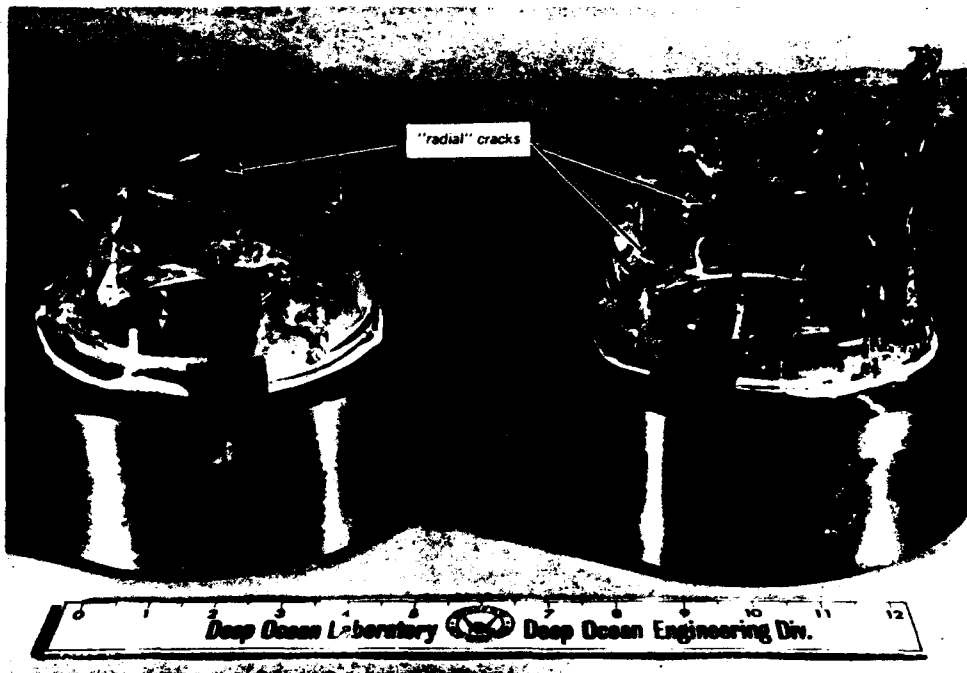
A typical example of radial cracking (4-inch-ID x 6-inch-long pipe with stainless steel 316 end-closure plates externally pressurized to 20,000 psi).
